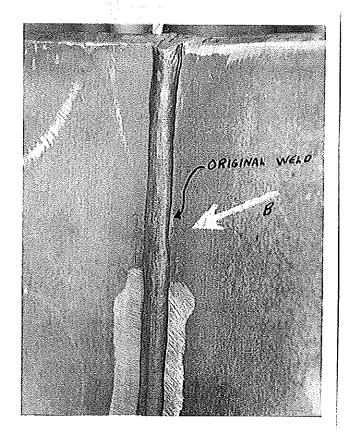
Inside of 3hn pipe showing area of failure.
